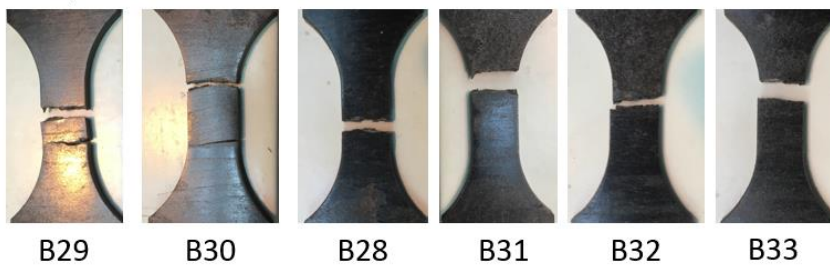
Fracture specimens for 90° coupons at R=0.
